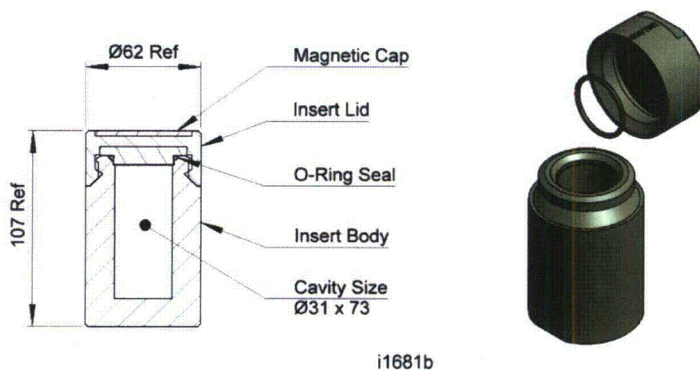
Shielding insert LS-31x73-Tu – Design # 3983
